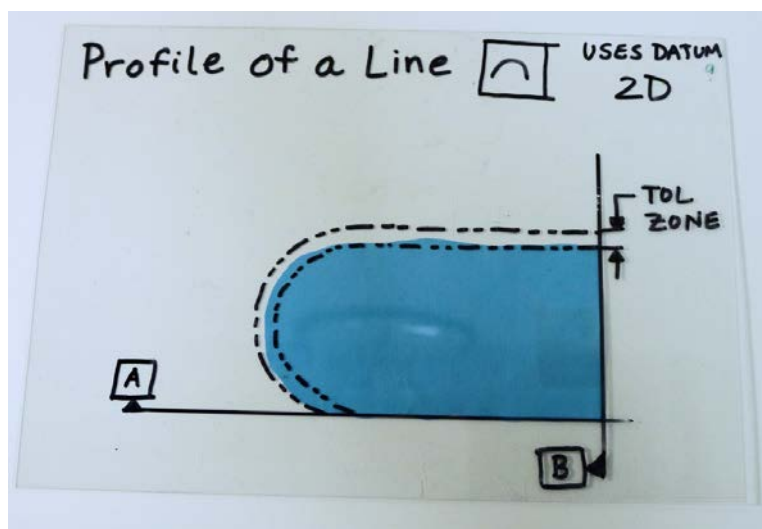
GD&T Spatial Learning Tool for Profile of a Line Tolerance
